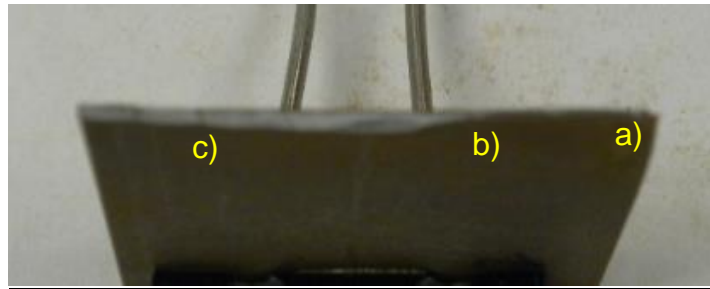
Photo of fracture surface of F22 showing three different locations
